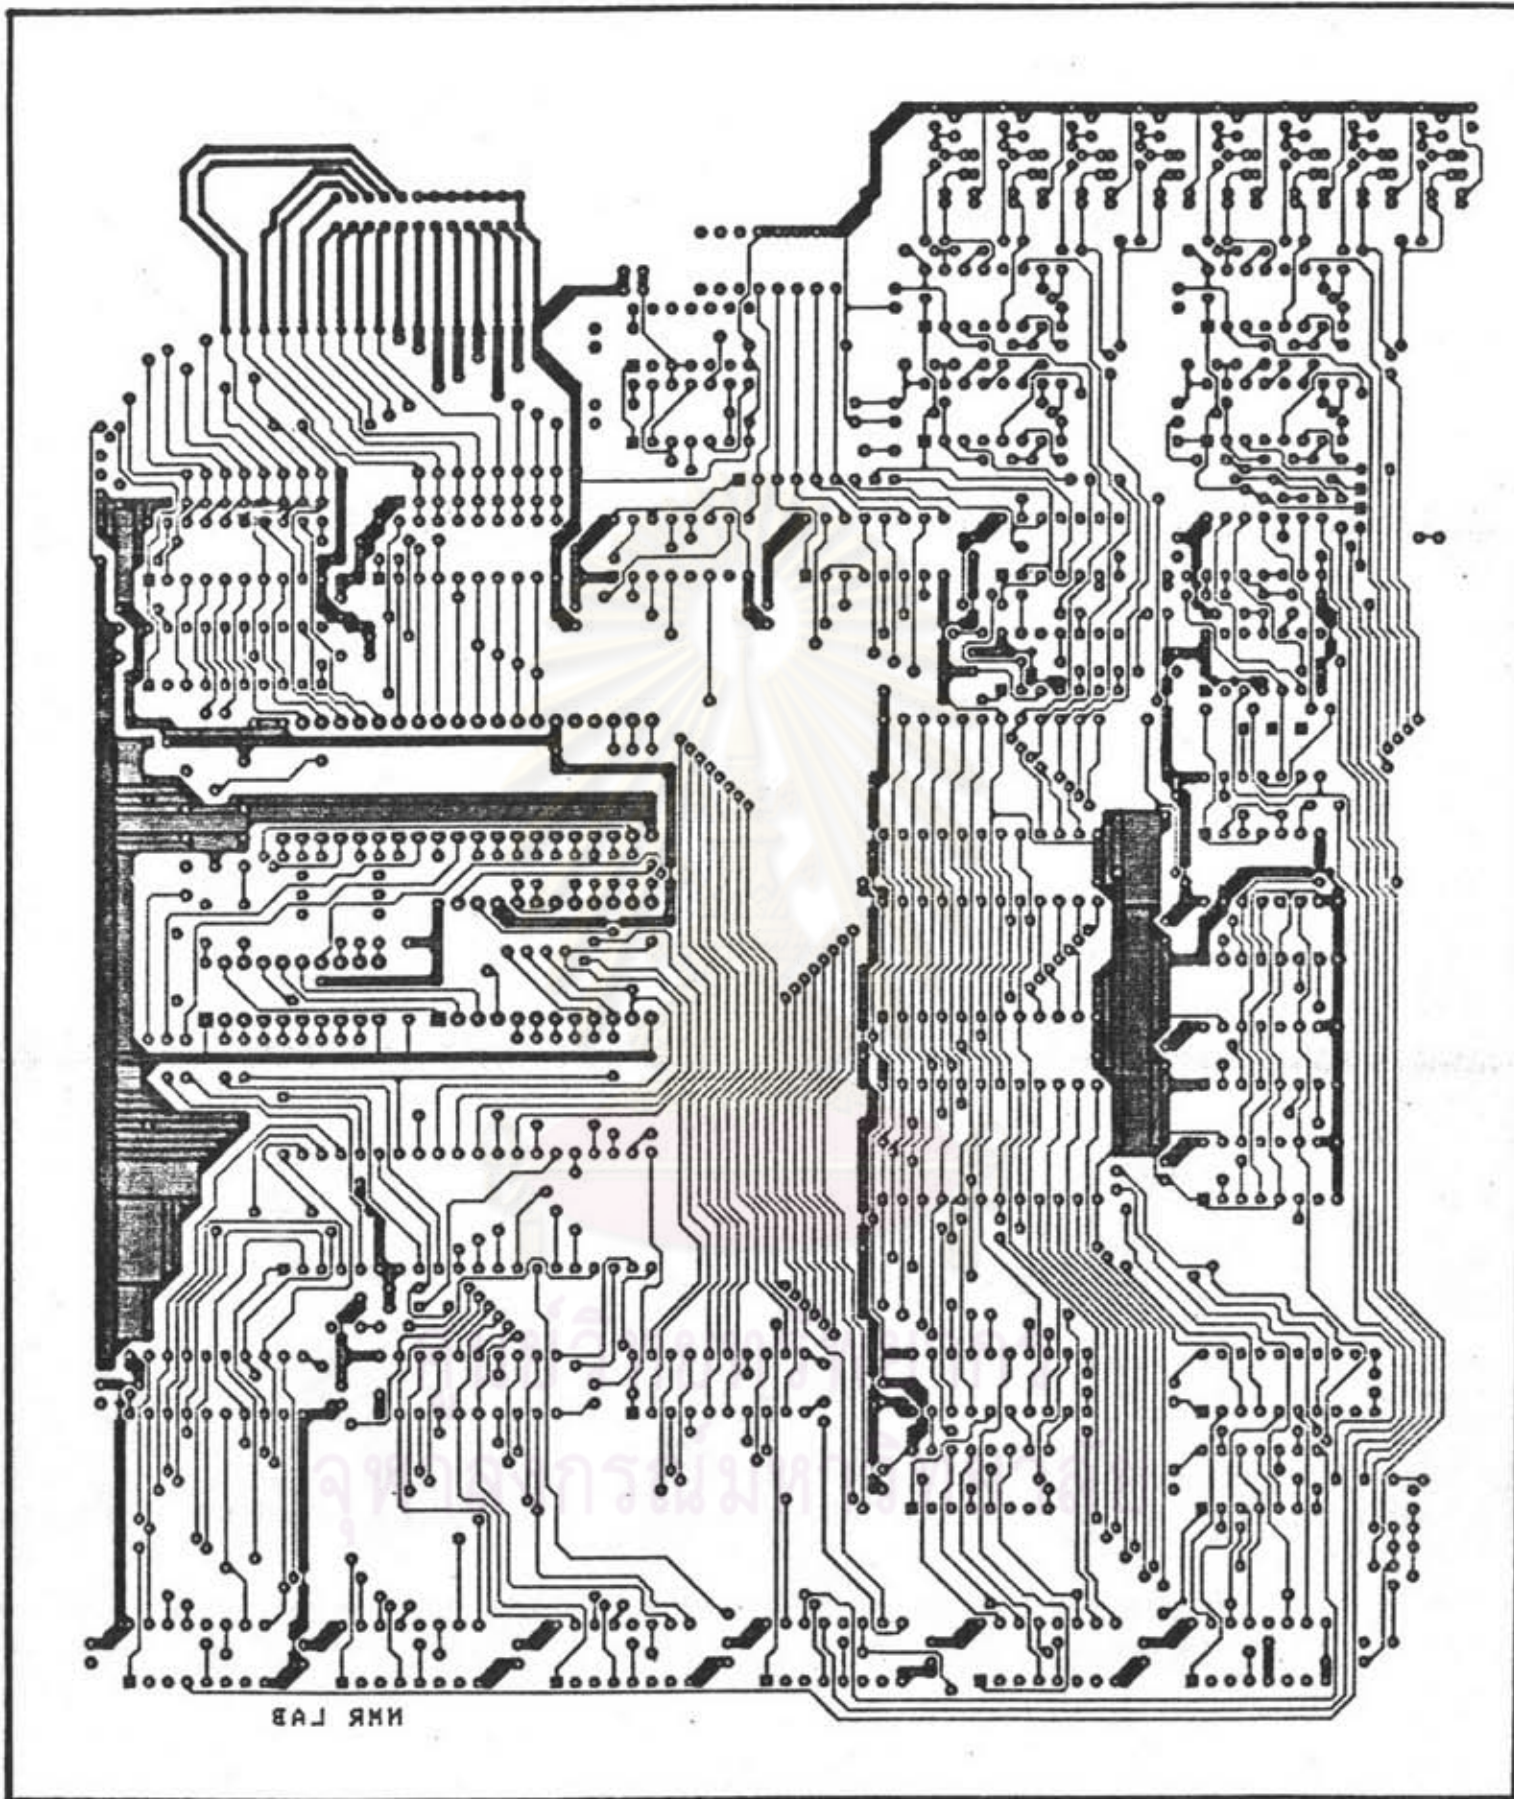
(a) The mirror of the solder side of the printed circuit board for PPM.
